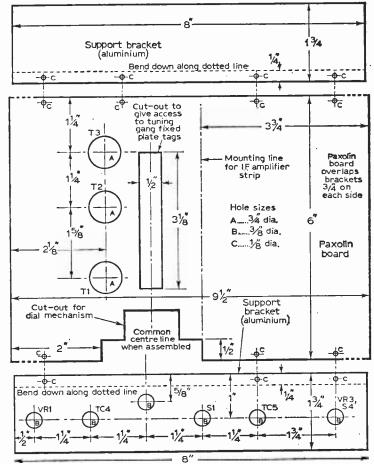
Dimensions of the paxolin board and its aluminium supports.
